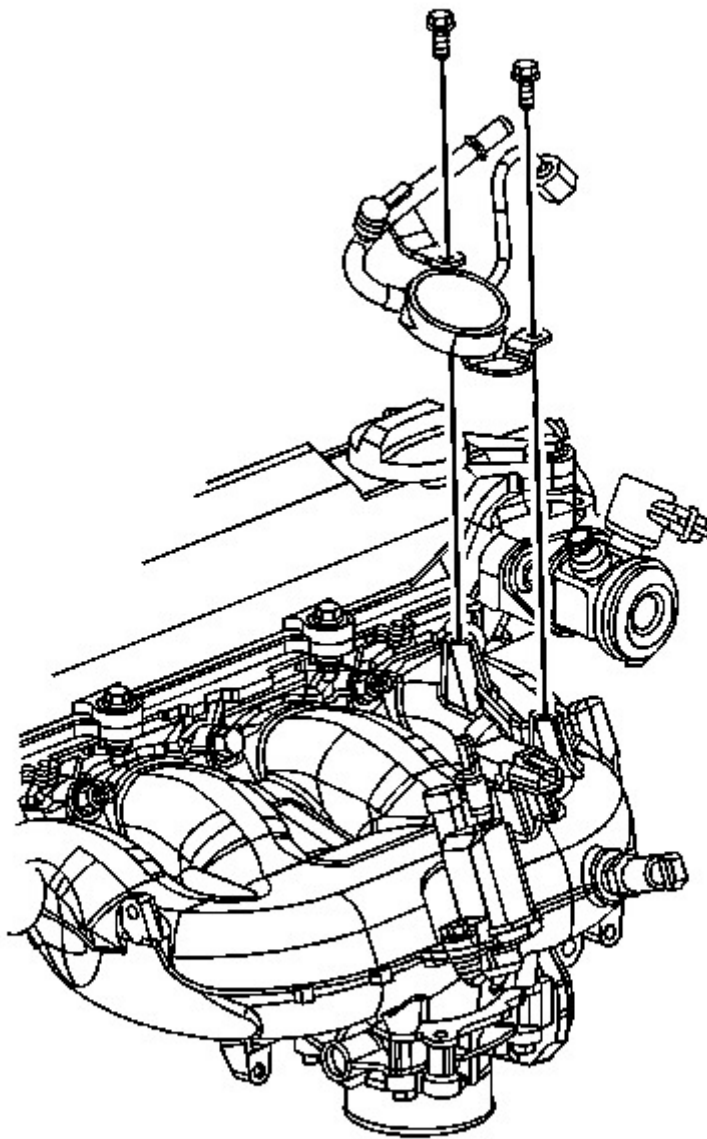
View Of High Pressure Fuel Pipe & Intake Manifold
